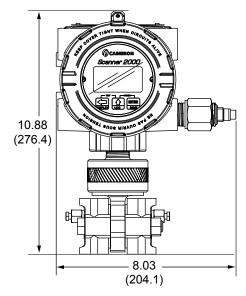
Scanner 2100 dimensions with momentary explosion-proof control switch
